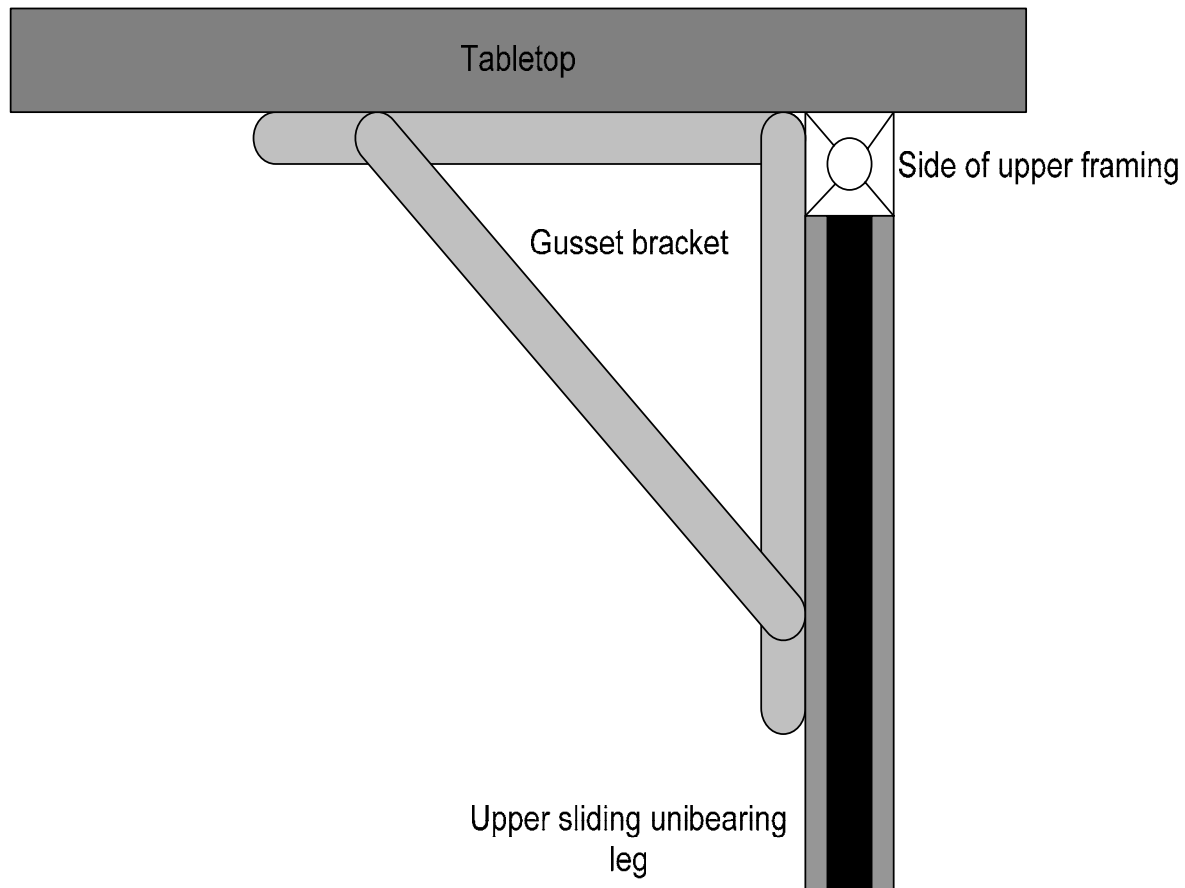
Gusset bracket reinforcing upper framing and leg connection
